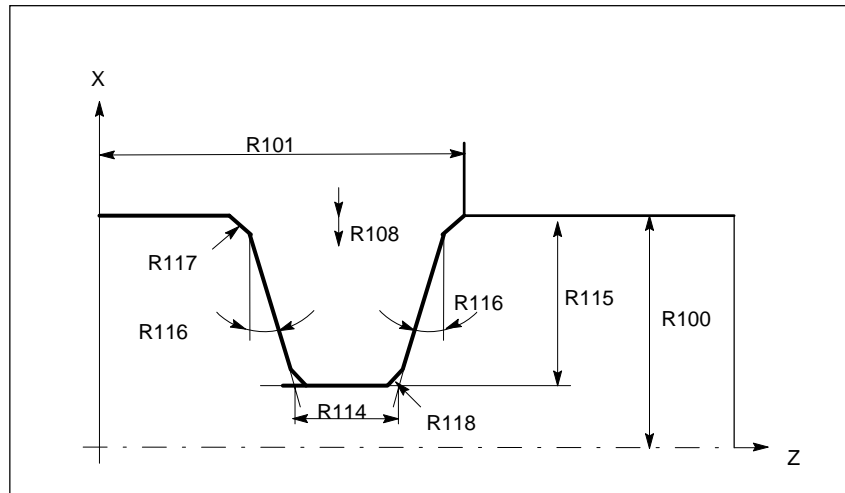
Parameters in the recess cycle in longitudinal machining
